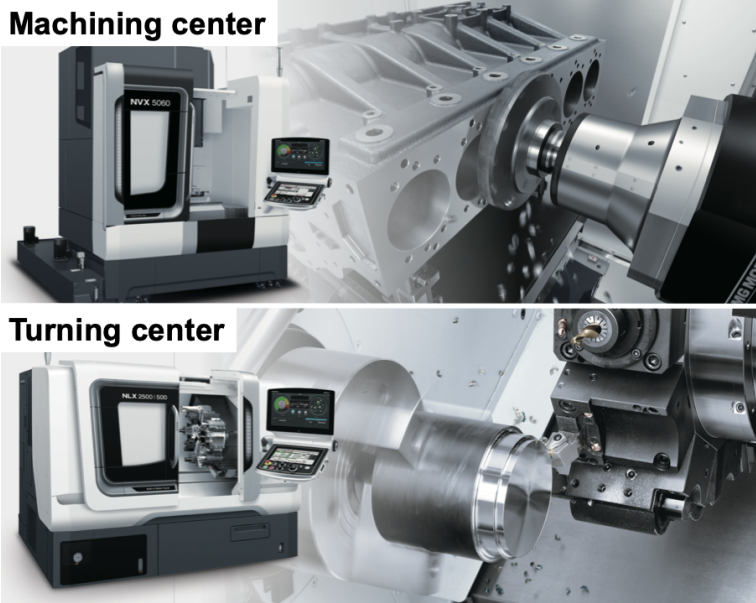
Machining center for milling or drilling of block part and turning center for machining of cylindrical part [11].
